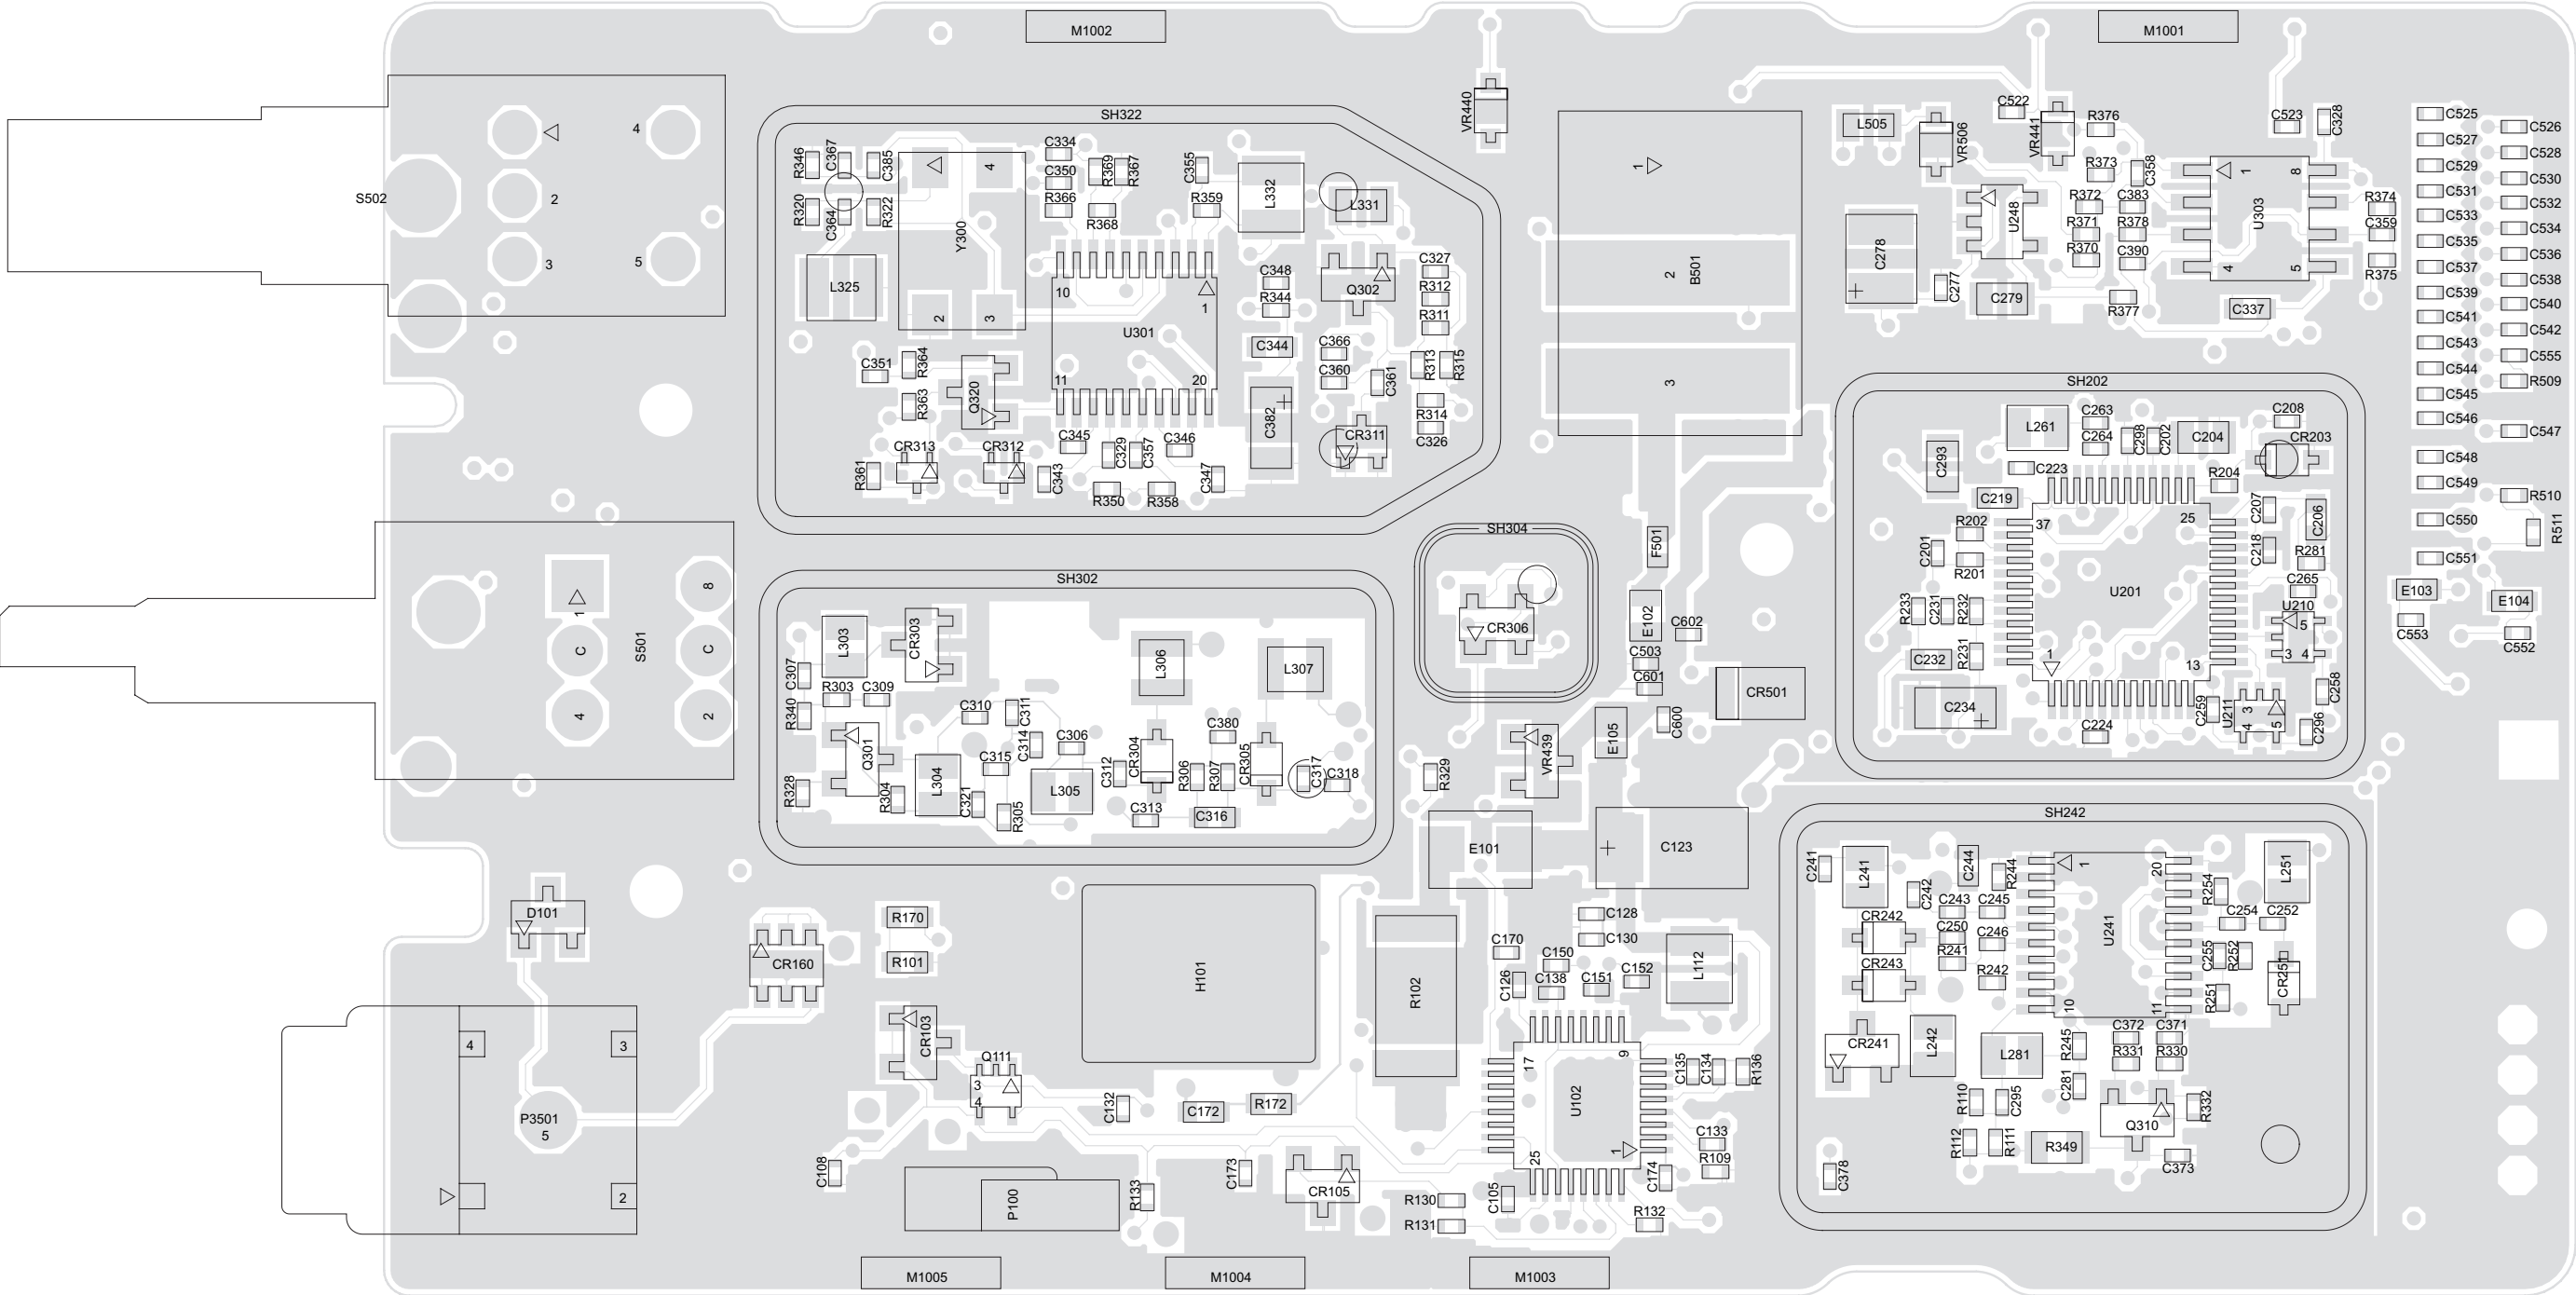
UHF (403-470MHz) Main Board Bottom Side PCB No. 8471441L01
